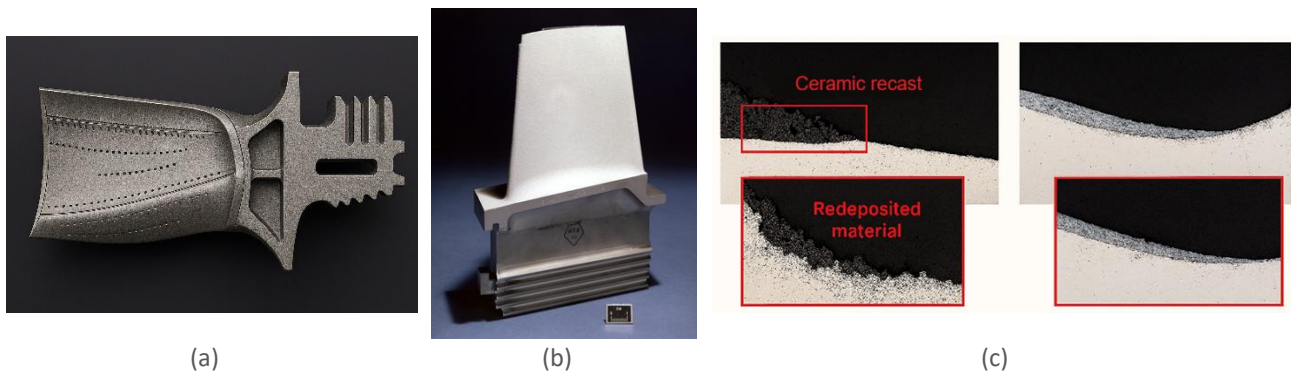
(a) A turbine blade with diffuser-shape cooling holes; (b) a turbine blade protected with a ceramic thermal barrier coating (TBC); (c) cross-sections of diffusers machined by laser in the nanosecond regime (left), displaying recast and redeposition defects, and the same diffusers machined with a femtosecond laser source (right).
